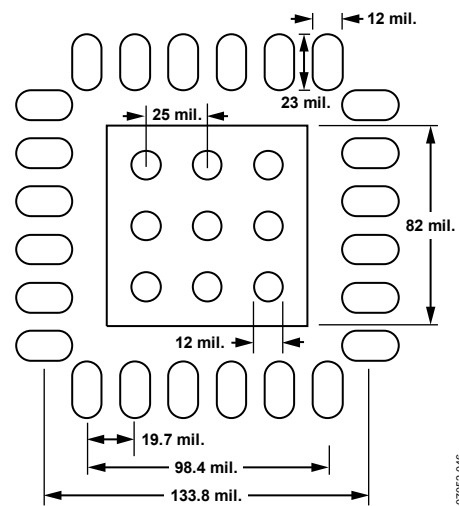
Dimensions for Evaluation Board Layout for the ADL5375 Package
